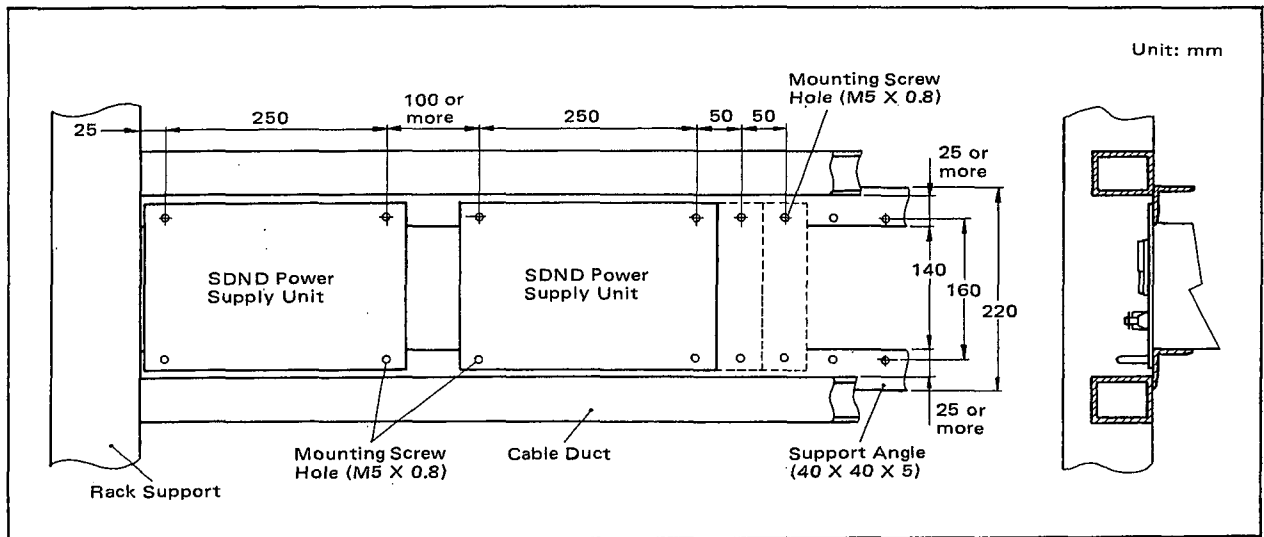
SDND Mounting Dimensions and Rack Construction.
